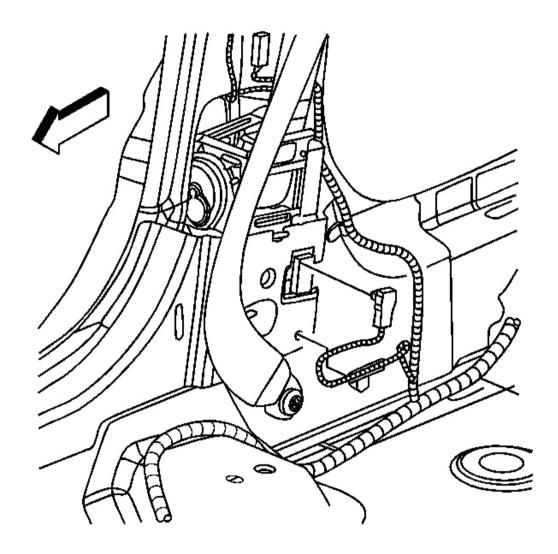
View Of Seat Belt Wiring Harness Routing Courtesy of GENERAL MOTORS CORP.
